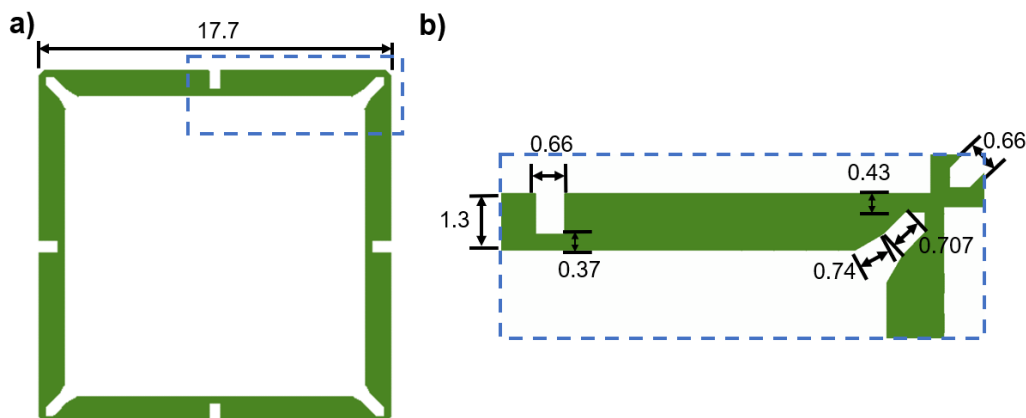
Schematic of the unit cell geometry used for magneto-mechanical metamaterials. a) Front view of the unit cell. b) Enlarged view of the asymmetric joint region. All dimensions are in millimeters.
